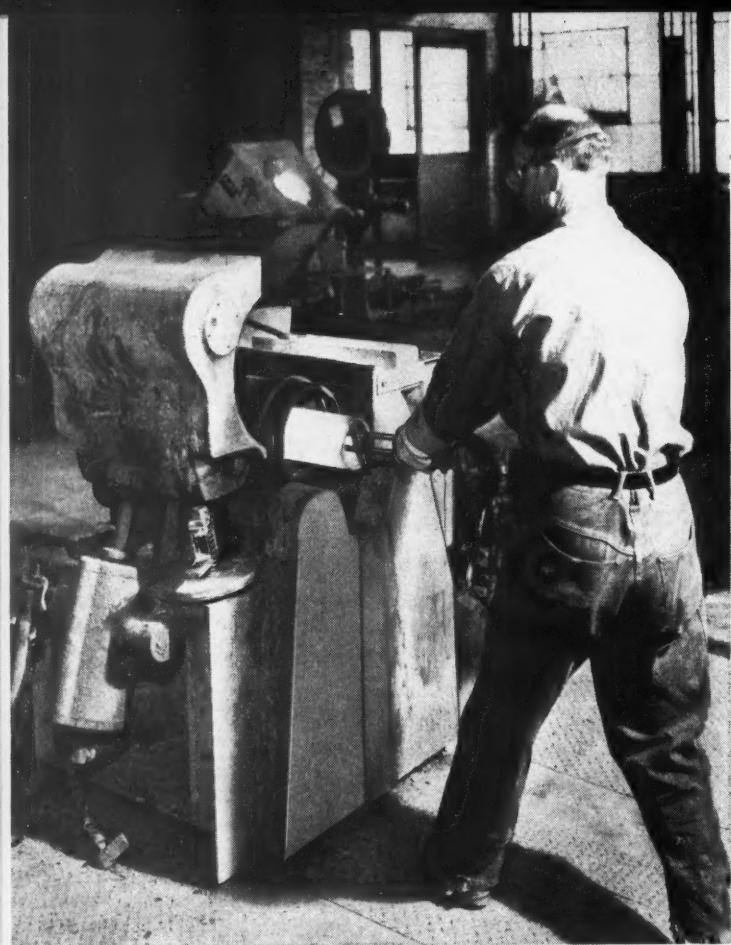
Centrifugally cast "K-Spun" cylinders are removed from molds in the casting machines and allowed to cool in still air at room temperature
